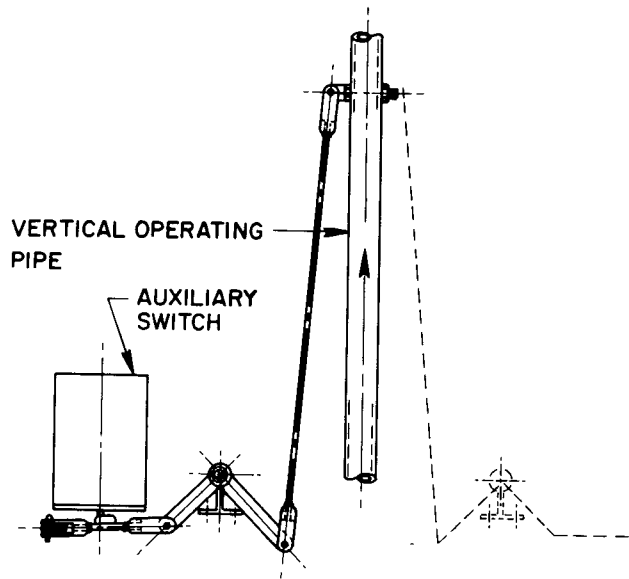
Auxiliary switch used with reciprocating operating mechanism.
